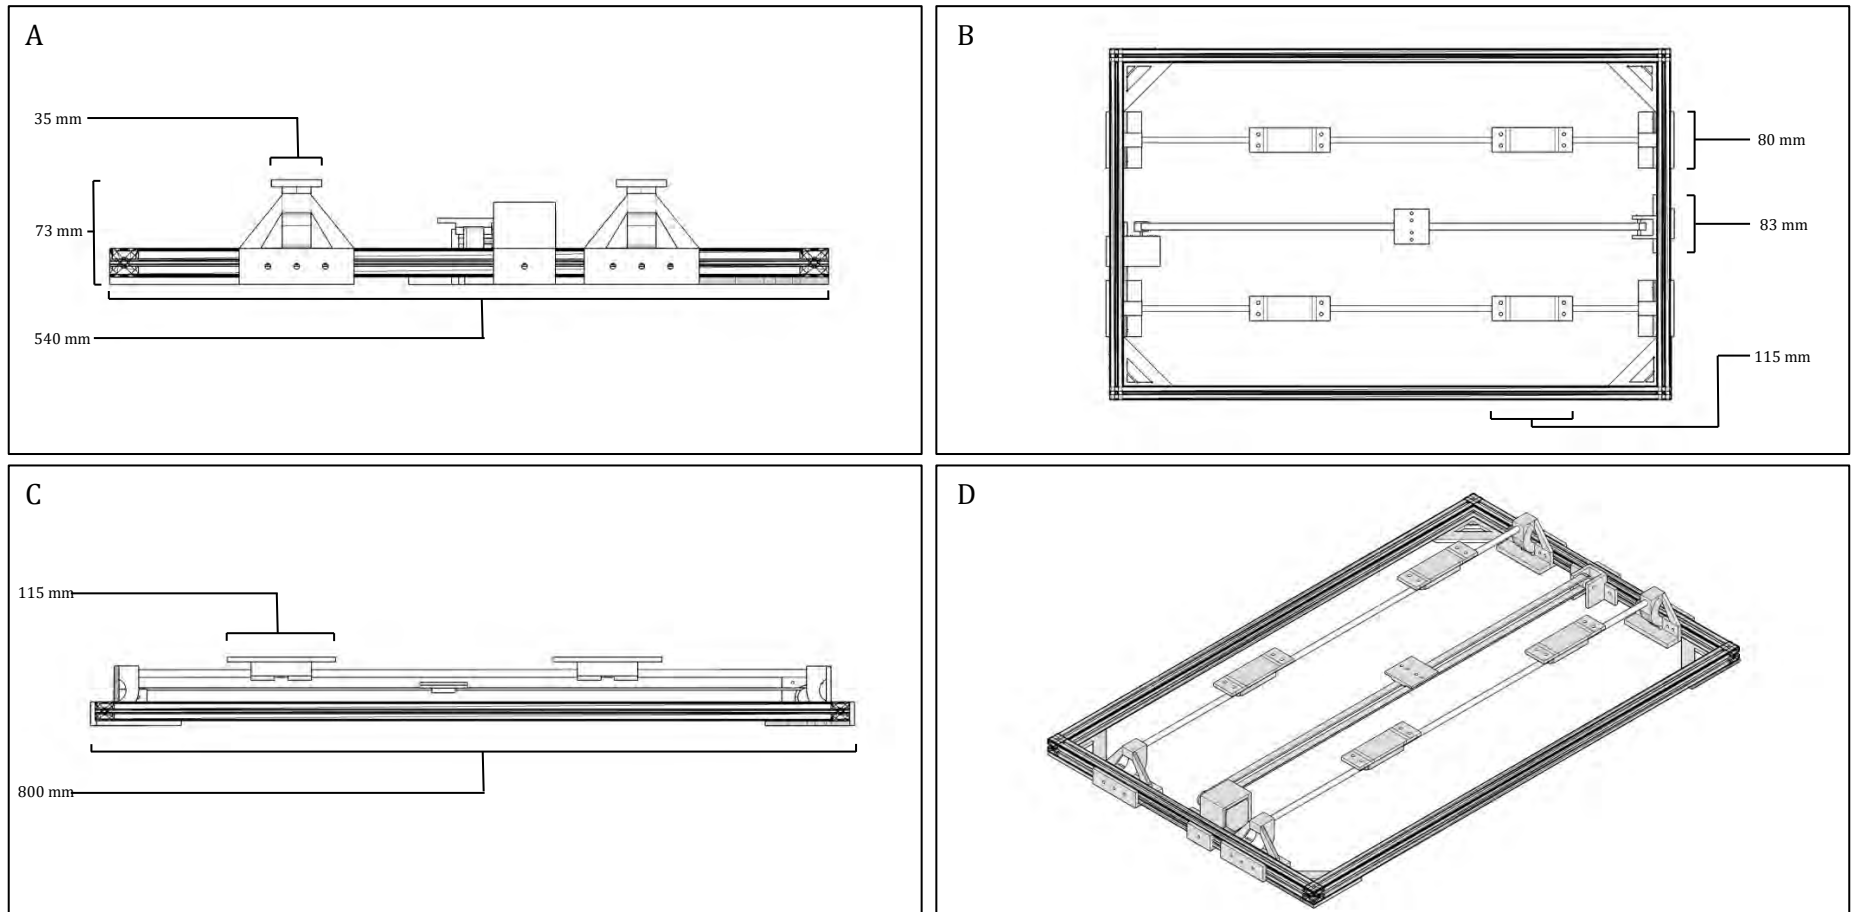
CAD model of the complete X-Axis assembly of the completed 3D bioprinting unit. A: Side view; B: Top view; C: Front view; D: Front perspective view.
